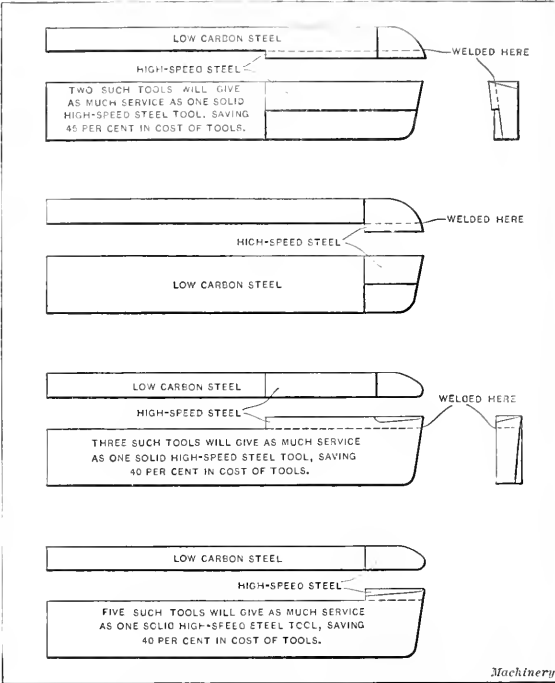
Rosner Built-up Lathe Tools with Points of Various Lengths
